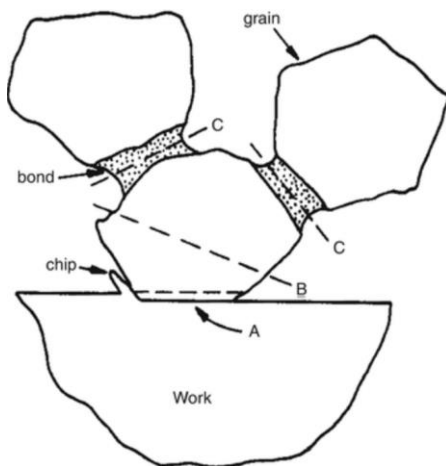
Schematic two-dimensional illustration of different wheel wear mechanisms. A: Attritious wear. B: Abrasive grain fracture. C: Bond fracture (Figure adapted from Malkin. [27]).
